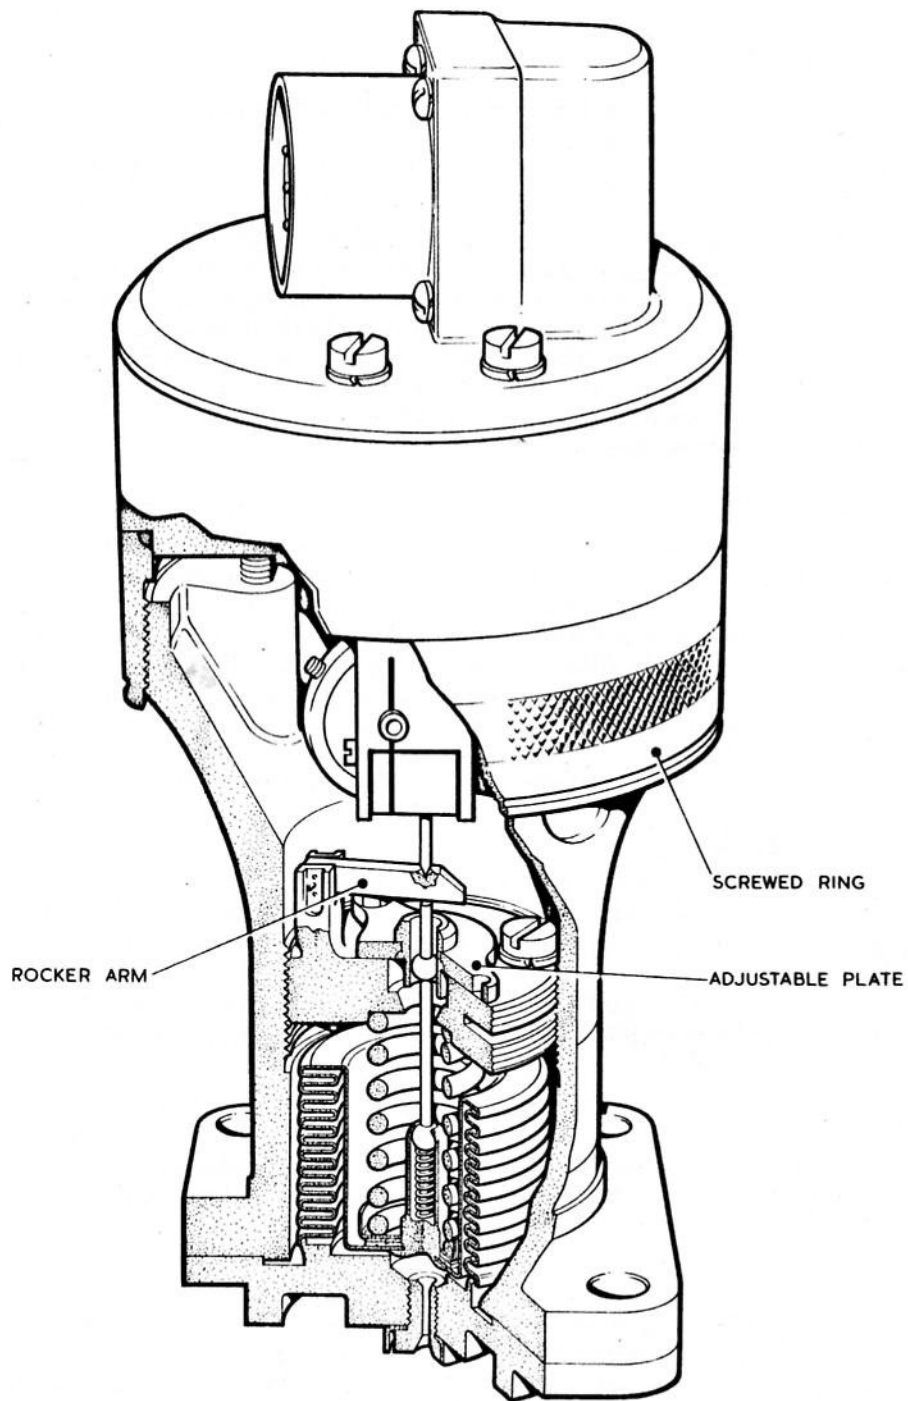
General arrangement, flange mounted transmitter hydraulic unit
